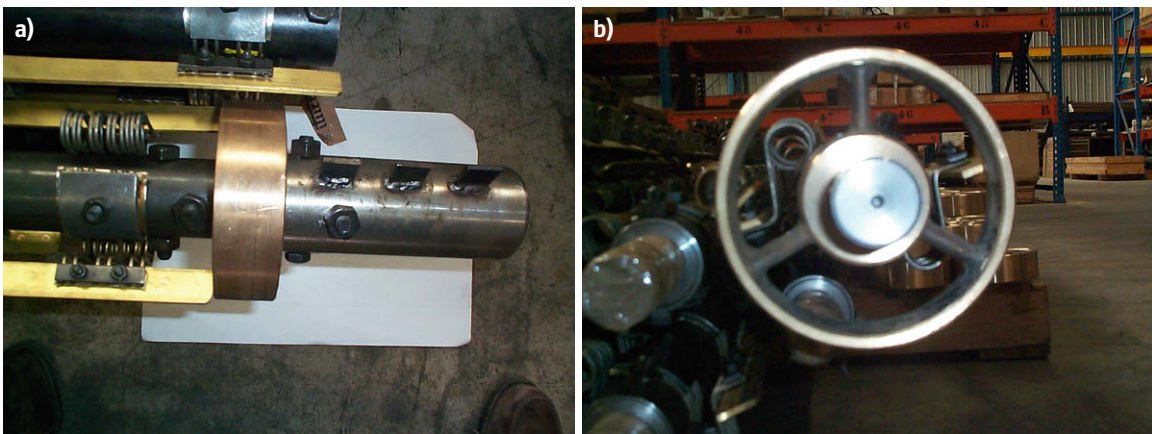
,b Armstrong SSE internals – assembled views. Top end view of pipe shaft, leaf spring, scraper blade and spider bearing (a), end view of pipe shaft, spider bearing (b)
